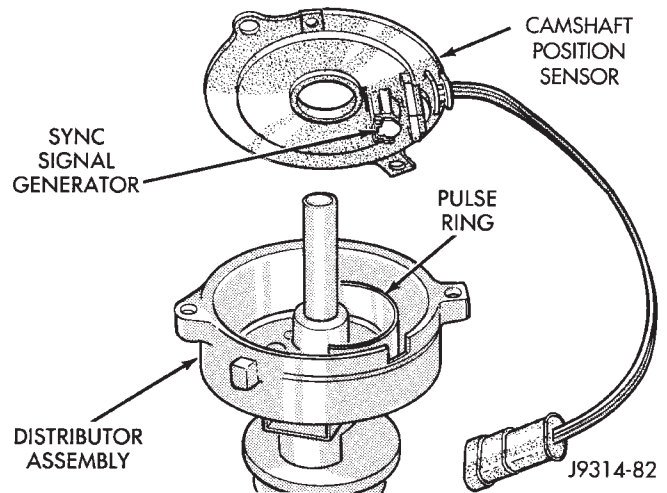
Distributor and Camshaft Position Sensor—Typical (5.2L/5.9L Shown)
